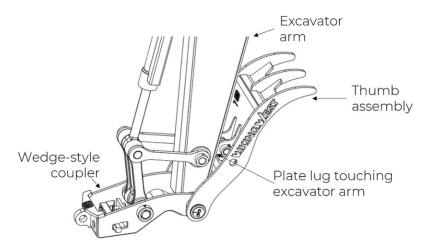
Thumb assembly rotated so plate lug touches excavator arm.
